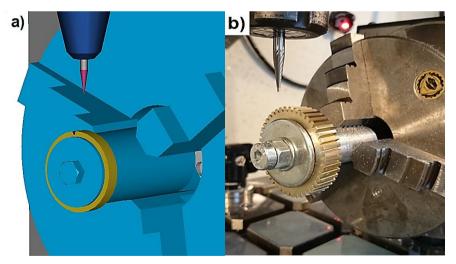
Simplistic tooth space machining: a) CAM simulation, b) machining on machine [source: own study]
